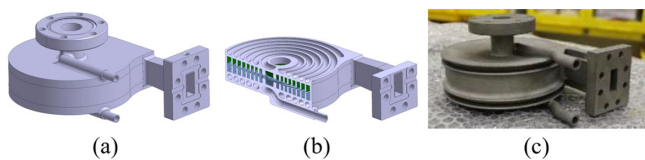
(a) CAD model, (b) cross section showing the spiralized waveguide and vacuum pumping holes, and (c) photograph of additively manufactured spiral rf load [209].
